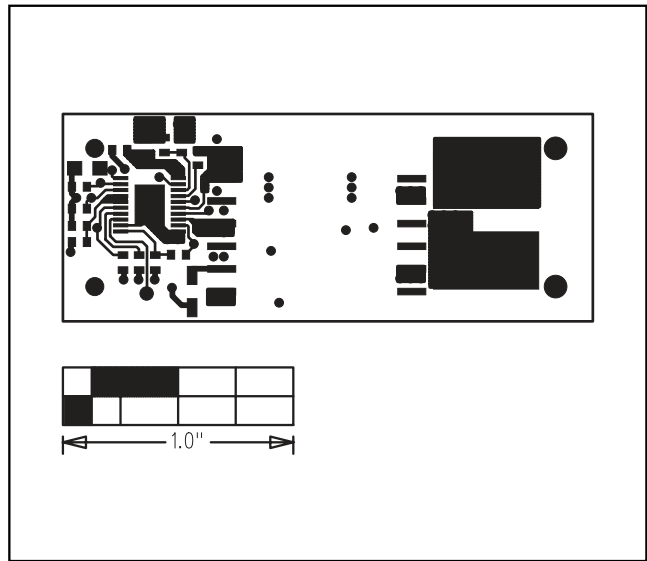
MAX5074 EV Kit PC Board Layout—Layer 1, Component Side
